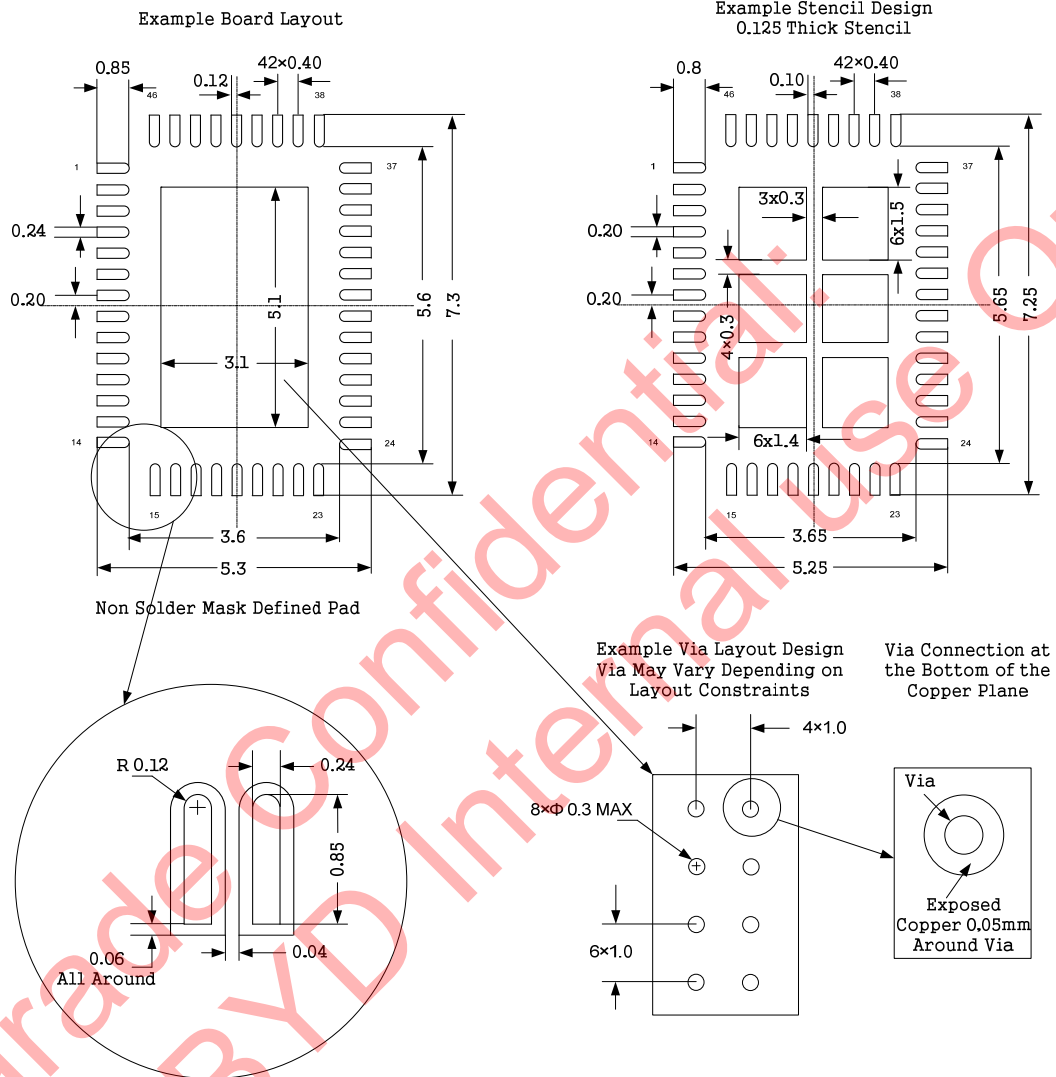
Exposed Thermal Pad Layout Guidelines – QFN46
